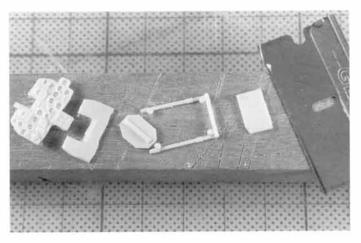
Remove the pour plugs and reinforcing bands from smaller resin parts, using a sharp, single-edge razor blade on a hardwood block.
